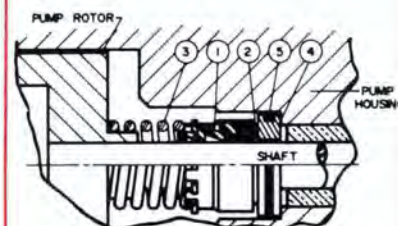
Non-pusher seal. The five basic elements are shown, 1. Bellows secondary shaft seal, 2. Rotating face, 3. Spring, 4. Stationary seat, 5. Seat gasket (O-ring).
